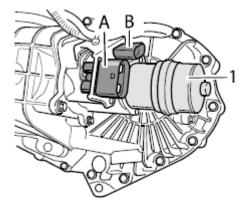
Identifying Transfer Box Servo Motor And Servo Motor Plug Connection Courtesy of PORSCHE OF NORTH AMERICA, INC.
